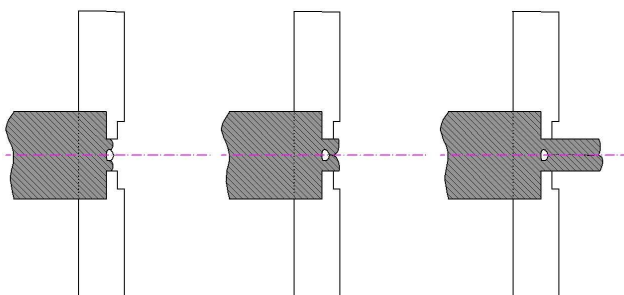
Metal flow throughout the die ports and seam weld development.
